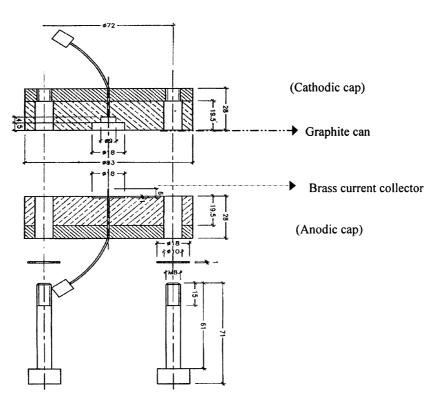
Sectional drawing (front view) of the test cell (a detailed description is given in Section 2).
